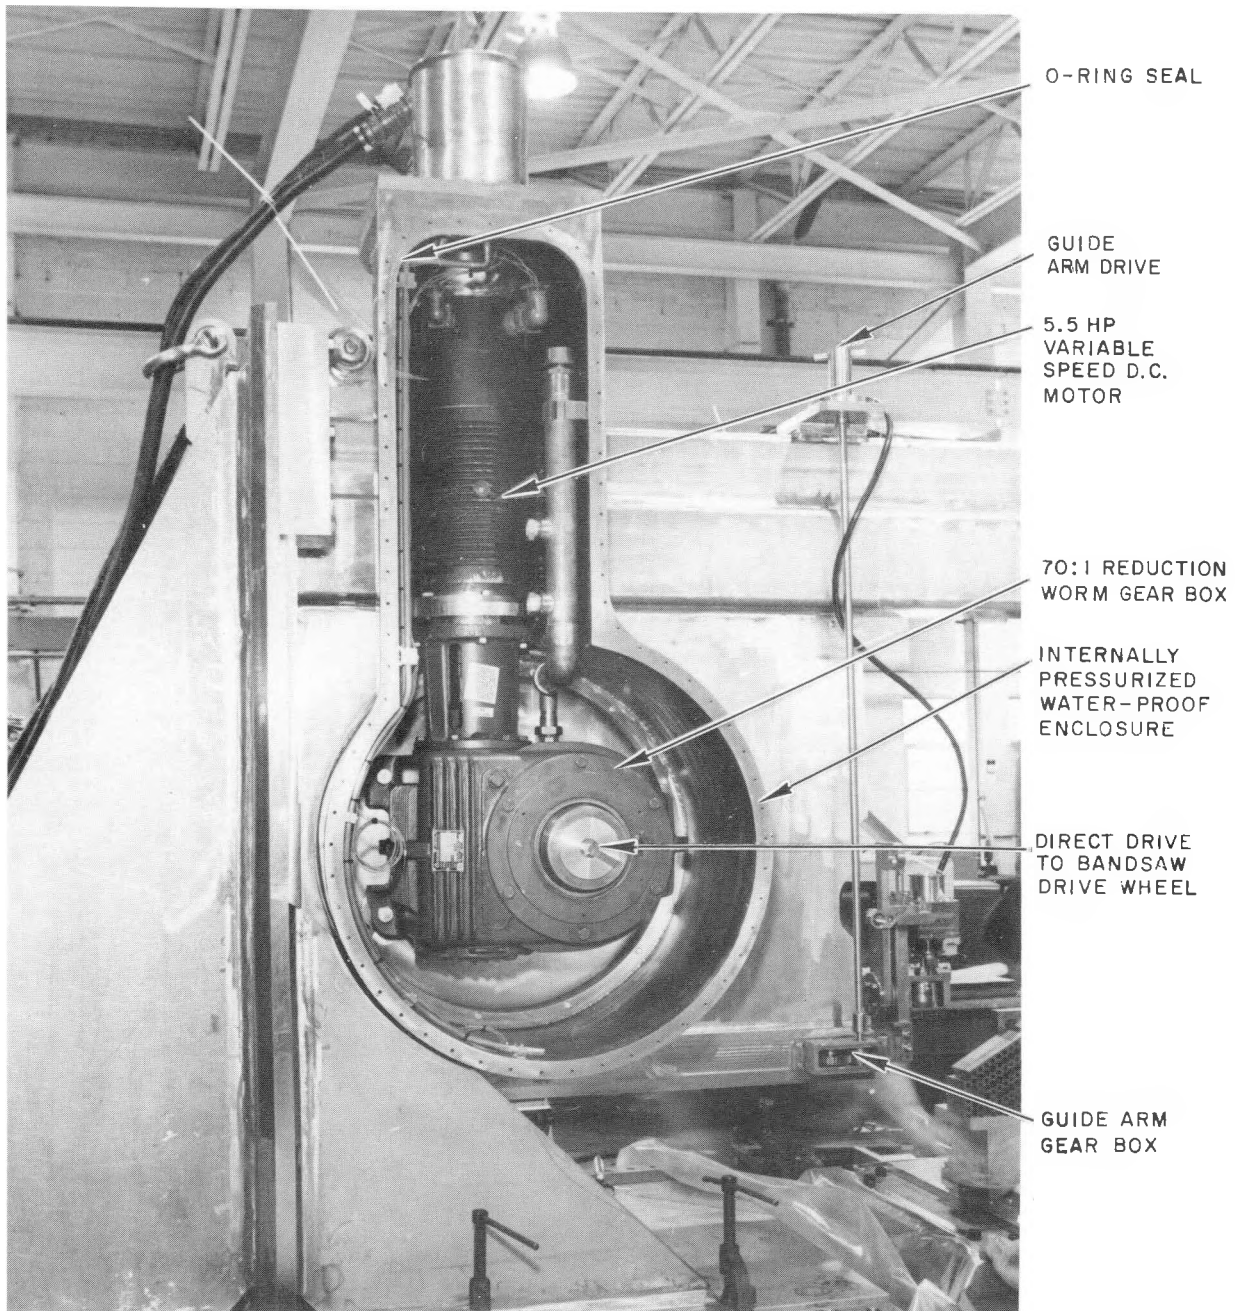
MDA-COS Gearbox Assembly With Housing Back Cover Removed
